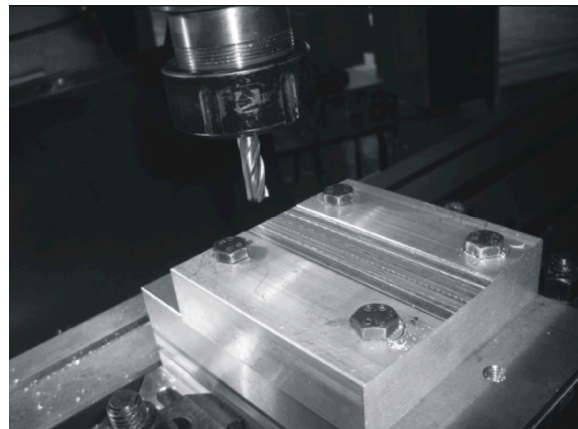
Milling operation performed for the purpose of collection of cutting force data.
